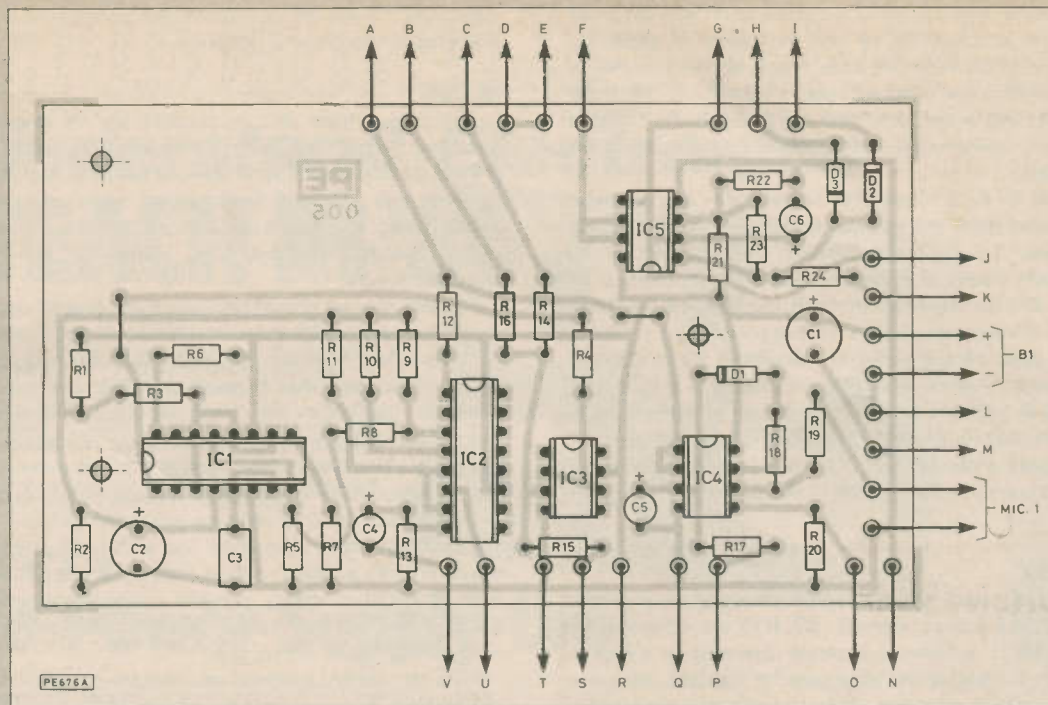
Component layout on the printed circuit board. This board is available from the PE PCB Service, order code PE-005
